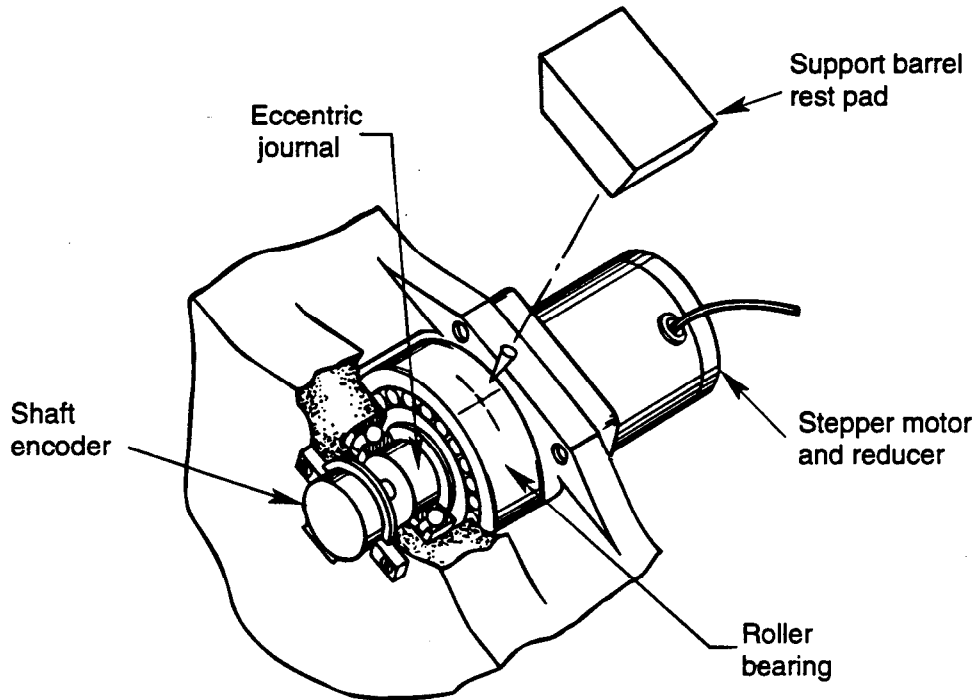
Detail of roller cam for supporting and adjusting the support barrel.
